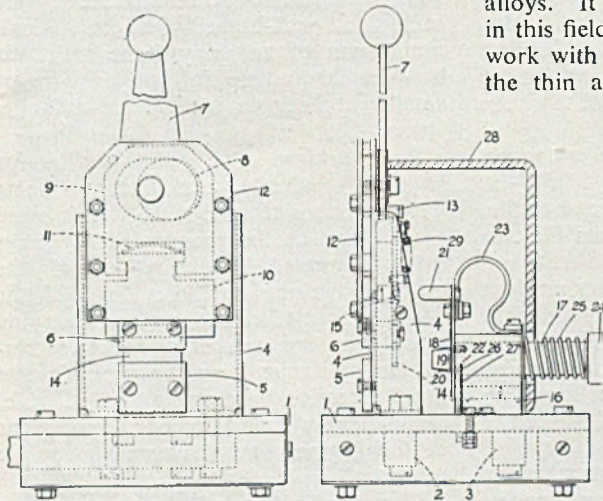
Front and side elevations of a machine for electrical fusion welding employing the condenser discharge circuit (B.P. 575,883/1946).
